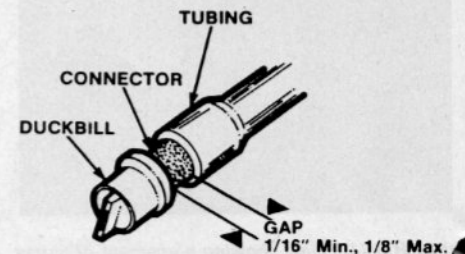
A—Gap between duck bill valve and tubing end must be 1/16-1/8 in.
